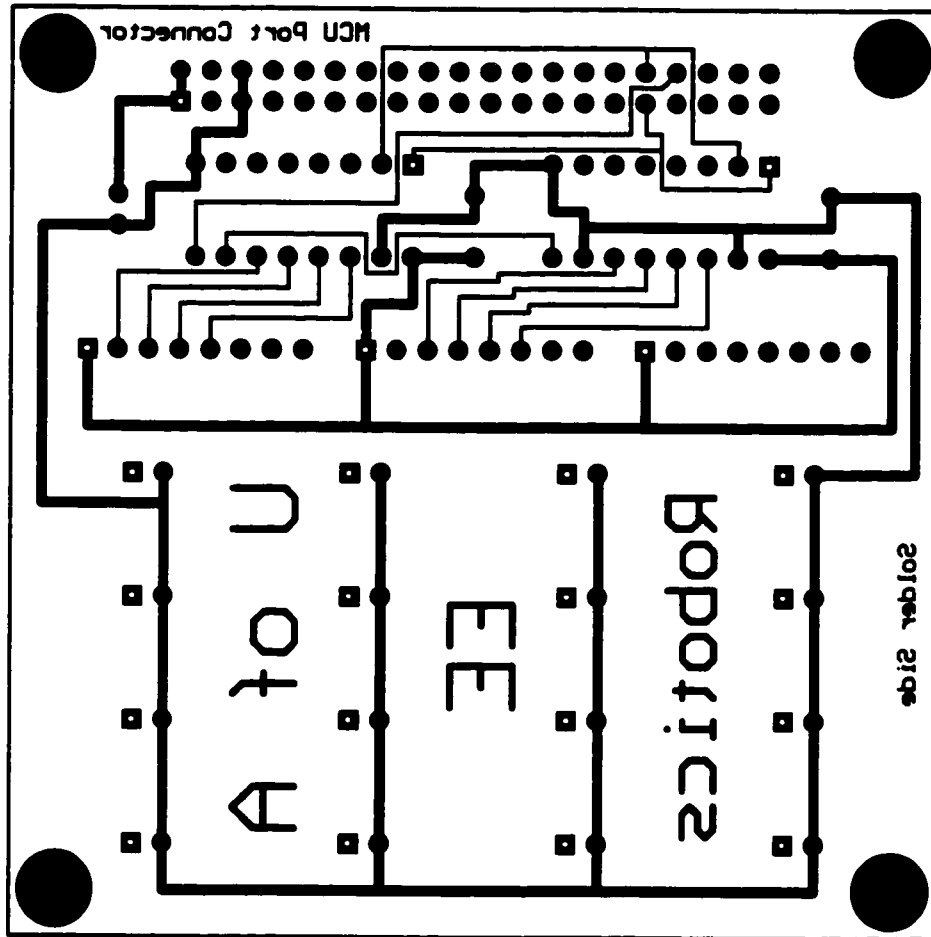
Bump Sensor PCB bottom-layer copper foil pattern (through-board view). Not to scale.
